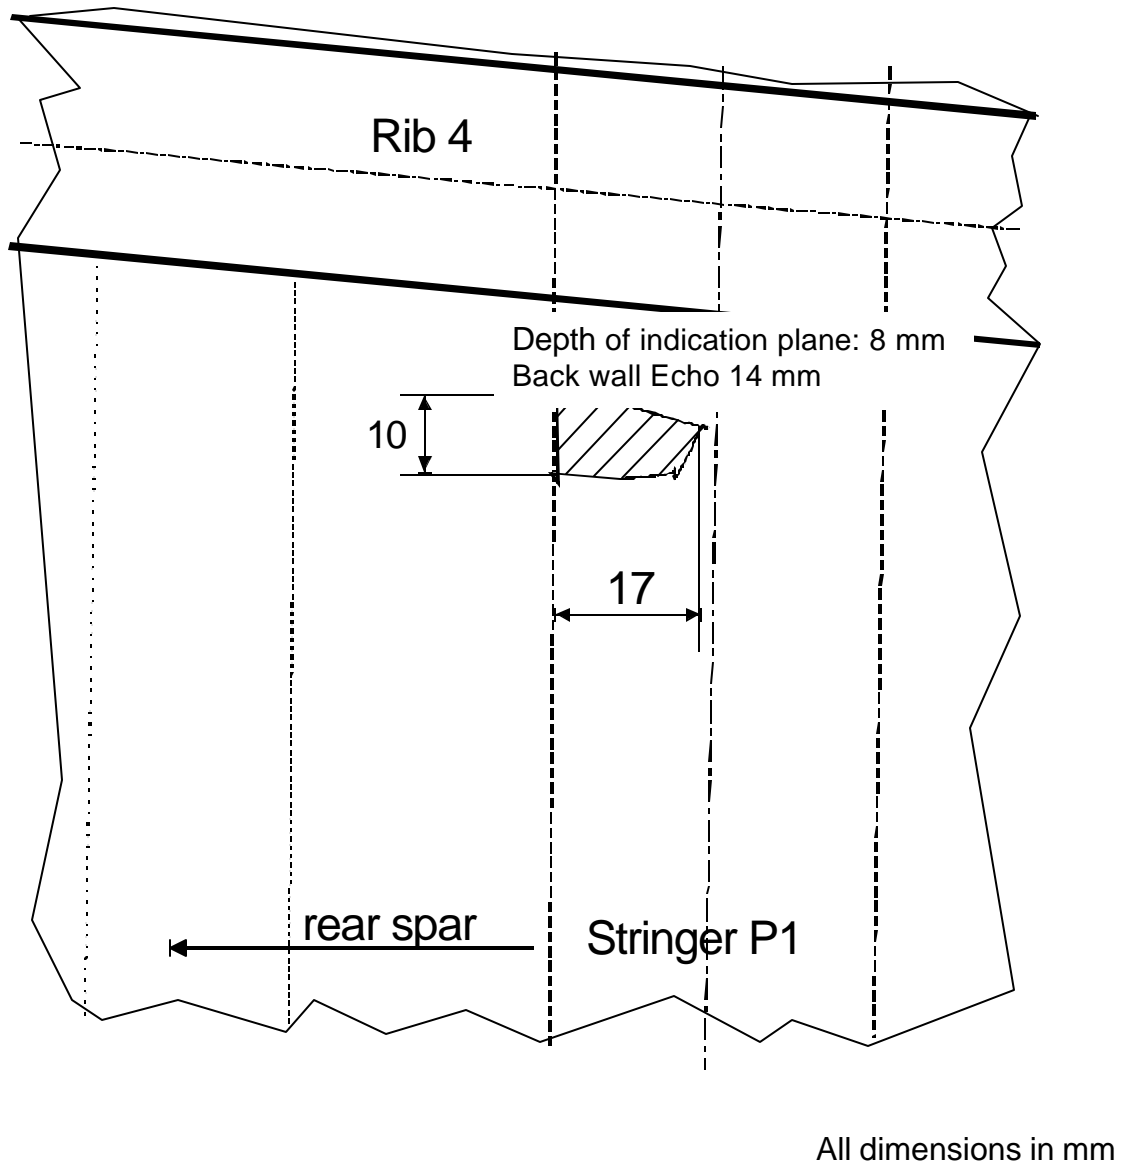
Dimension and location of the indication on stringer P1 / rib 4.
